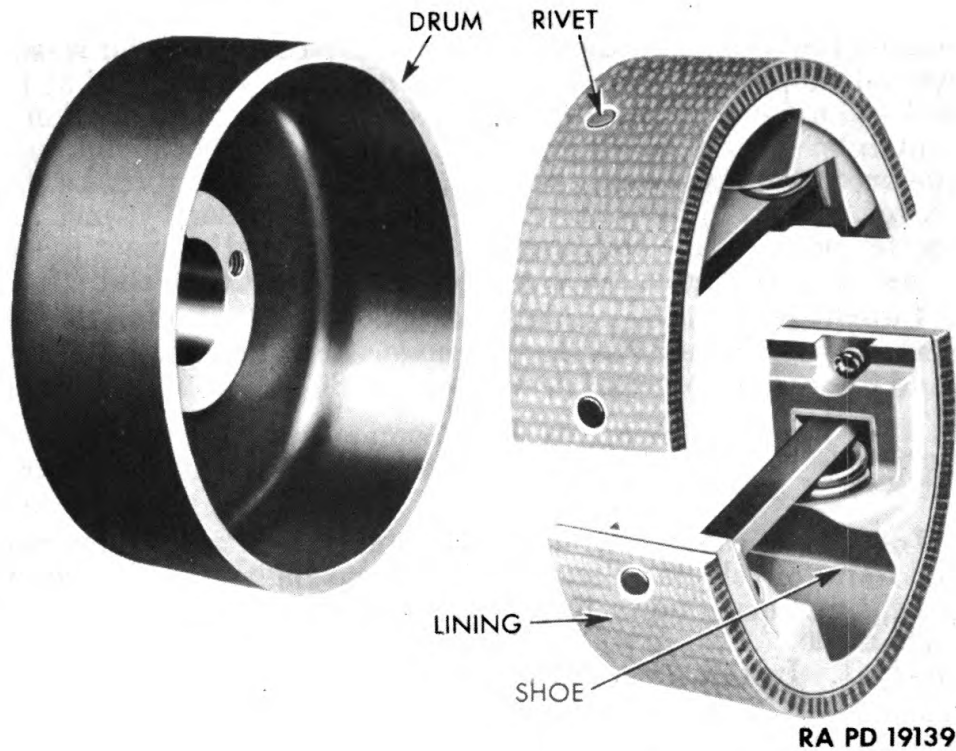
Winch Worm Brake Drum and Shoe — Disassembled
